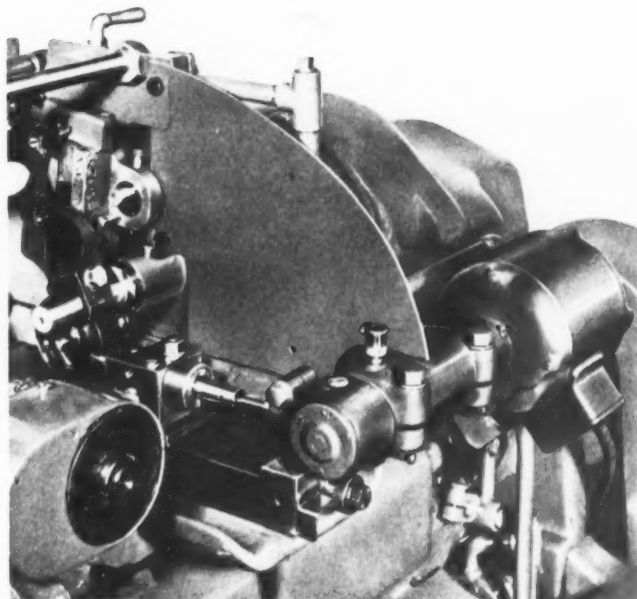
Motor Drive for Cross-drilling Attachment Installed on B & S No. 0G Automatic
